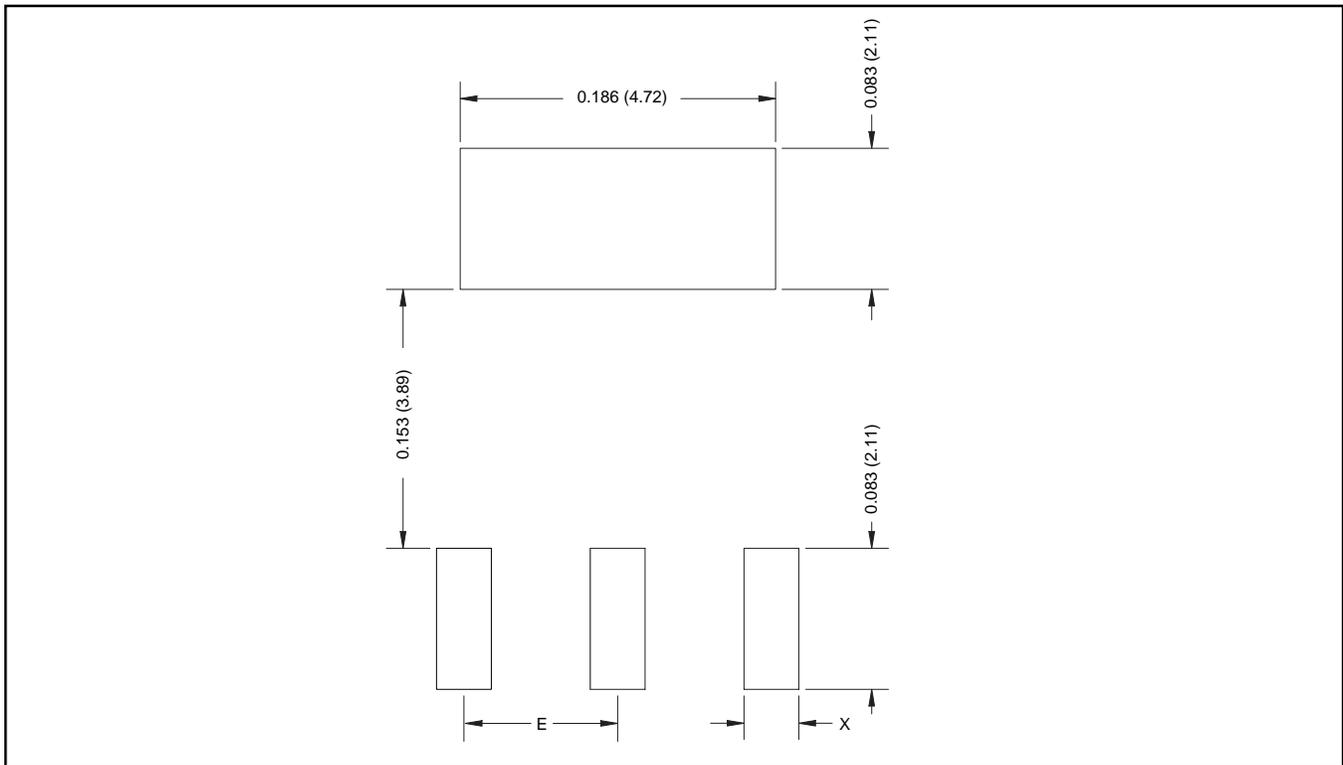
PCB Pad Dimensions for SOT223—Inches (mm).
